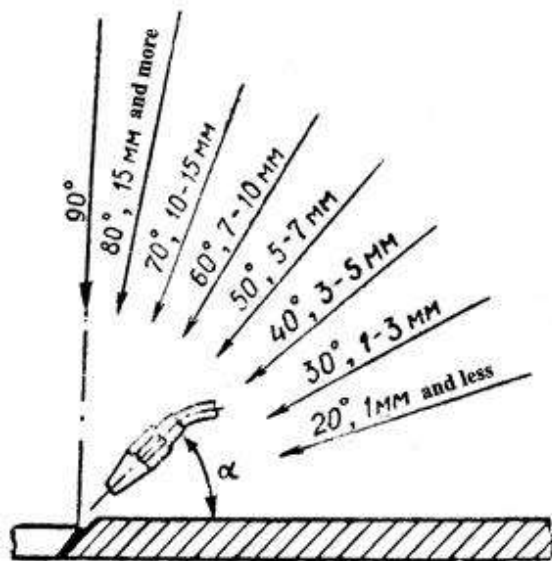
Dependence of inclination angle of contactor tube of welding burner on welding metal thickness.
